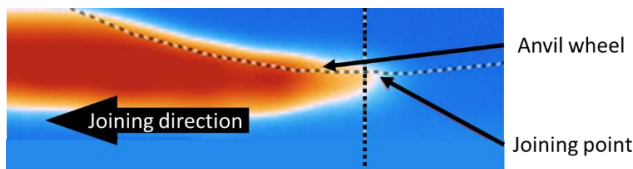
Infrared image of a continuous ultrasonic welding process with a seam spacing of 1 mm [6]
